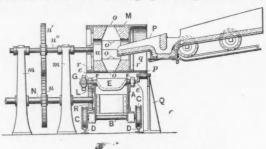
THE RAMSAY CASTING AND CONVEYING MACHINE.
